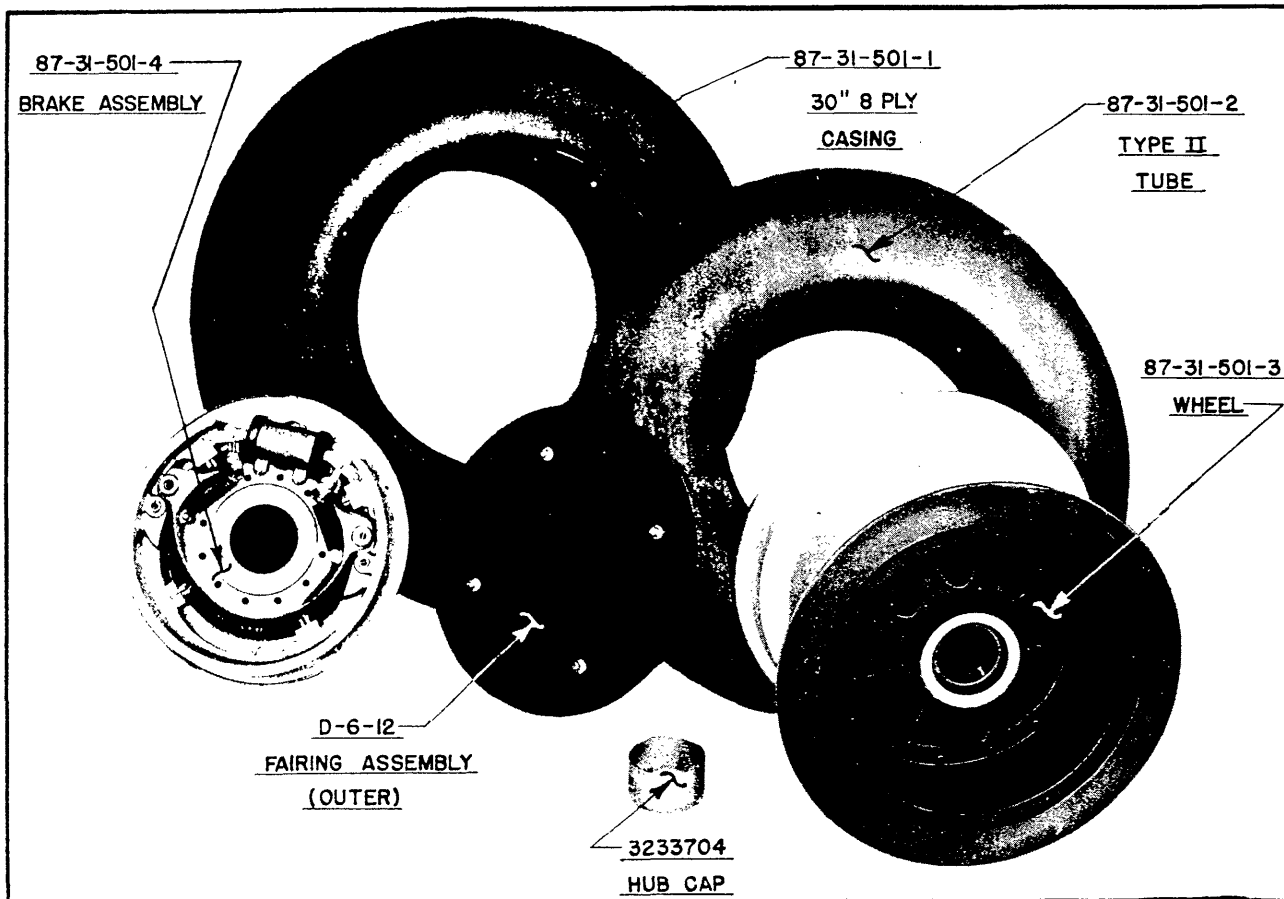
Wheel &amp; Brake Assembly Disassembled
